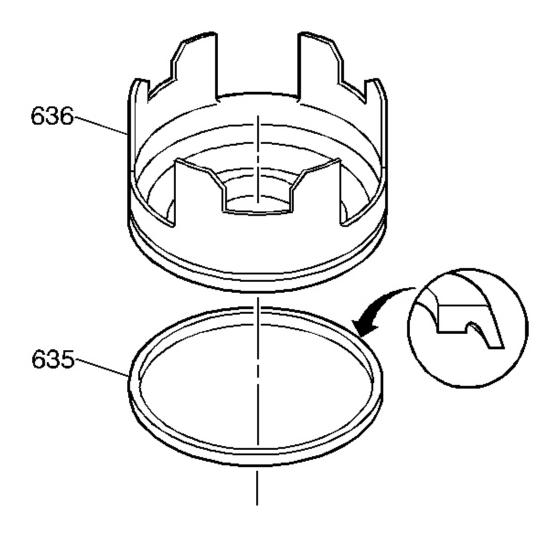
Identifying Input Clutch Piston Outer Seal Courtesy of GENERAL MOTORS CORP.
